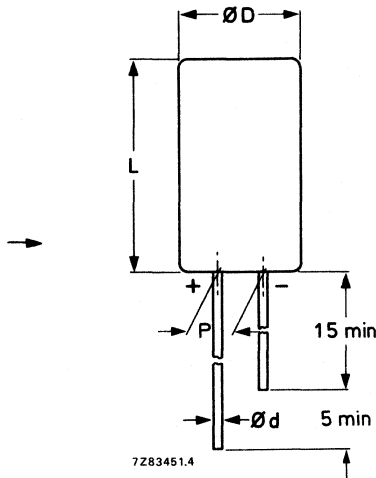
Style 1; see Table 3 for dimensions ϕd , ϕD , L and P.
